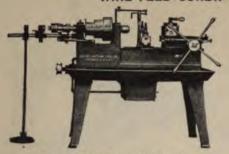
NO. 1 PLAIN HEAD MACHINE.
